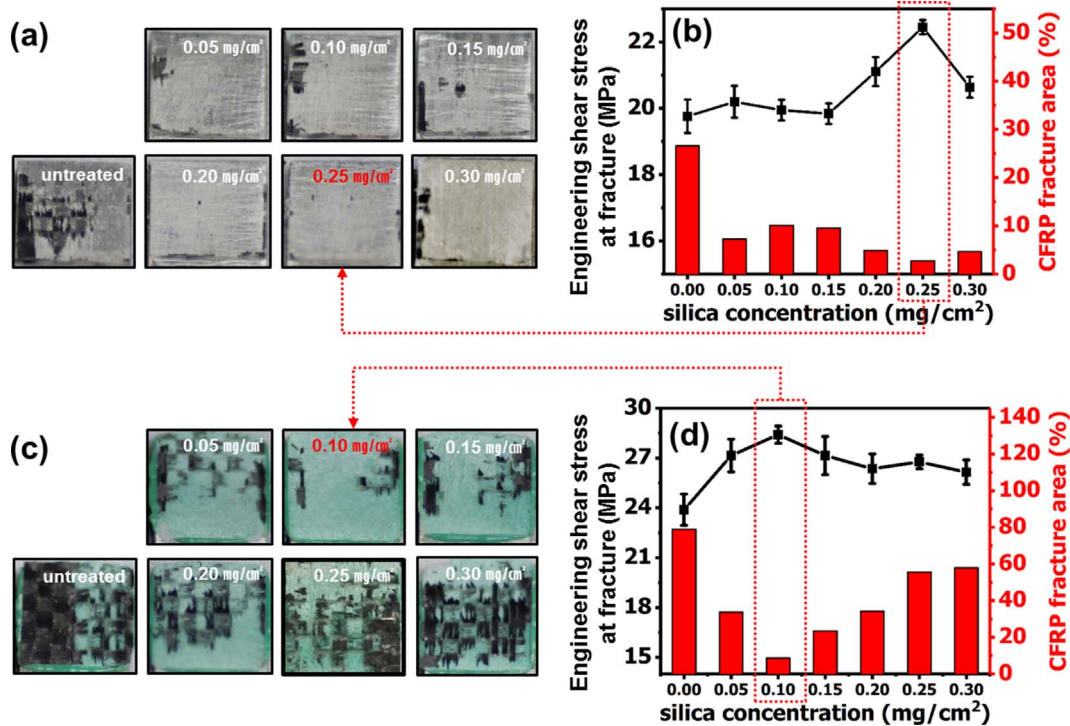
Engineering shear stress at fracture and CFRP fracture area depending on the silica concentration: (a) and (c) show images of fractured surfaces on the Al side after the lap shear test, where the black areas represent fractured CFRP on the gray (or green) epoxy adhesive; (b) and (d) show the adhesive strength and CFRP fracture area plotted versus the silica concentration. (a) and (b) depict the results with the Araldite 2011-A/B adhesive and (c) and (d) indicate those with the LF-501 adhesive. The maximum adhesive strength with the minimum CFRP fracture is obtained with silica concentrations of 0.25 mg/cm² and 0.10 mg/cm² for Araldite 2011-A/B and LF-501, respectively.
